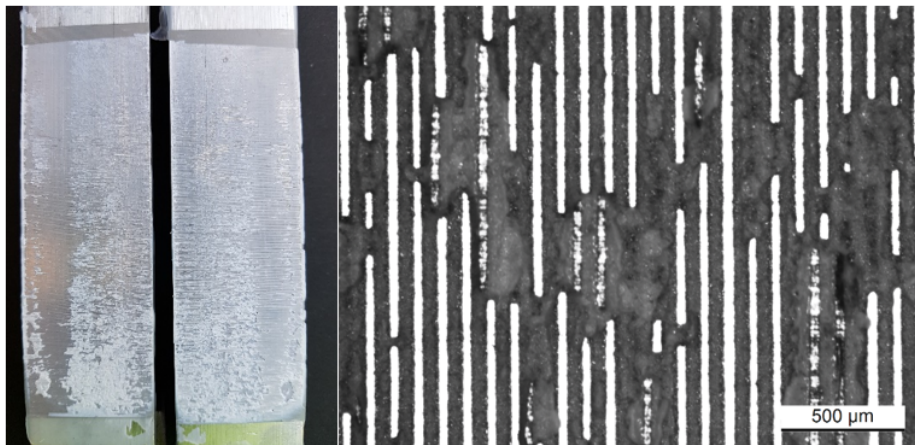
Fracture surface of a T-joint ablated with $ED=1.71 \text{ J/mm}^2$ and $H=100 \mu\text{m}$ [154]
